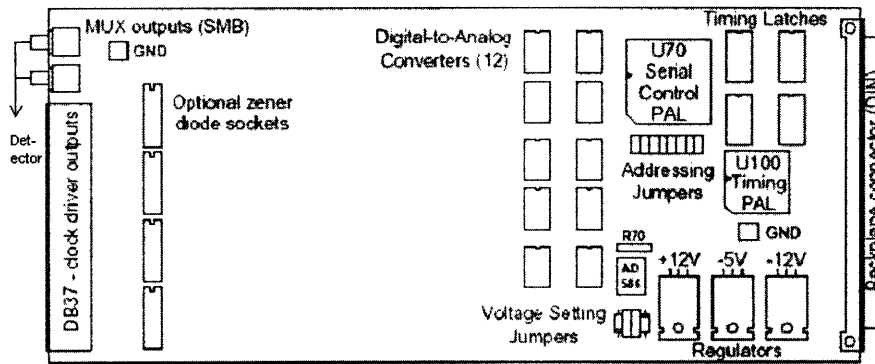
Clock Driver Board Parts Layout. The diagram is a rough layout of the entire clocking board. It does not show the full detail of each clock, but this detail is shown in appendix A.[3]
